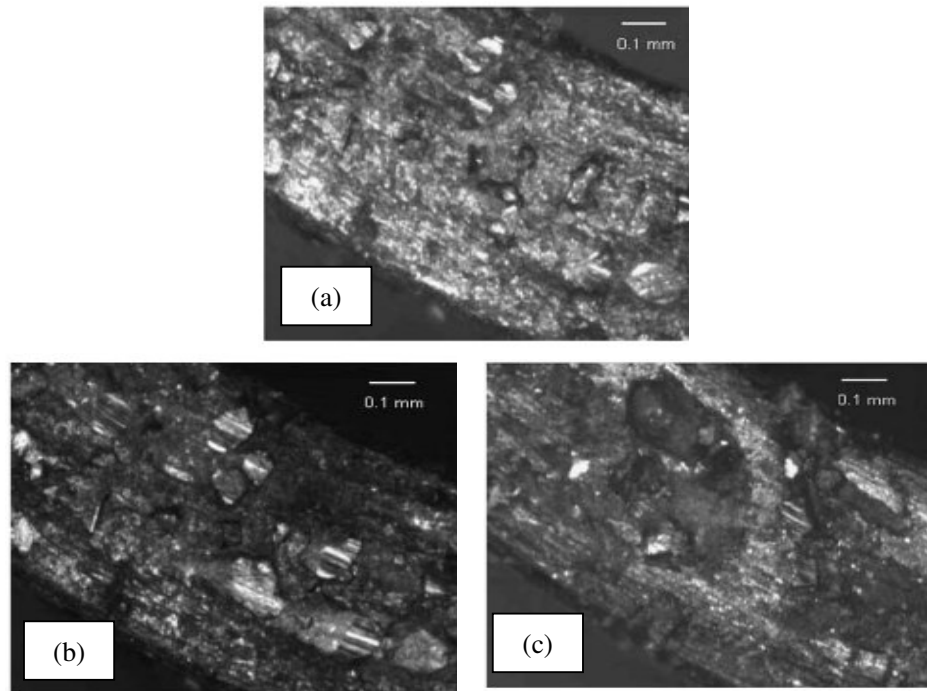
Topography of tool end face (a) Before drilling test on SiC
